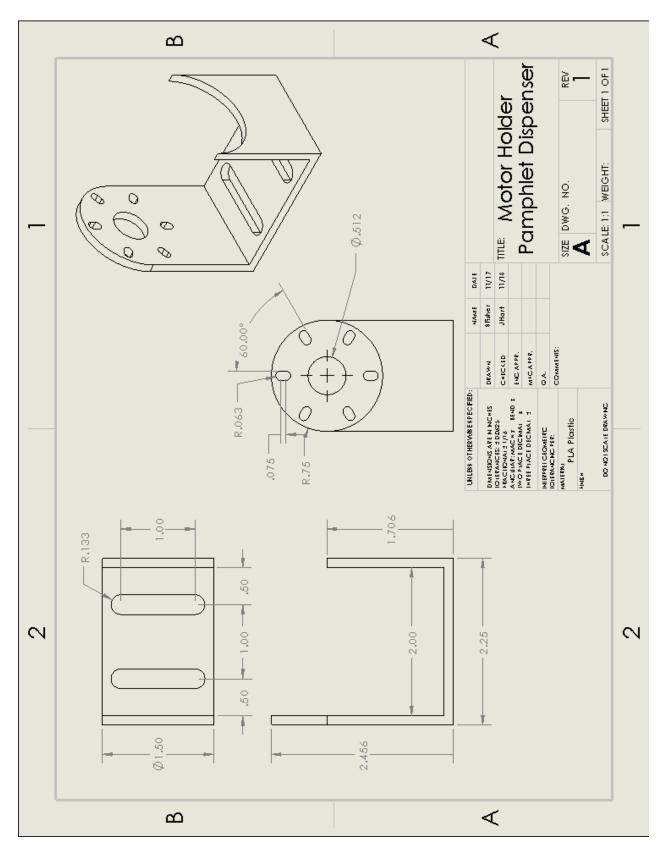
Prototype Pamphlet Dispenser Motor Holder Drawing (not to scale)
